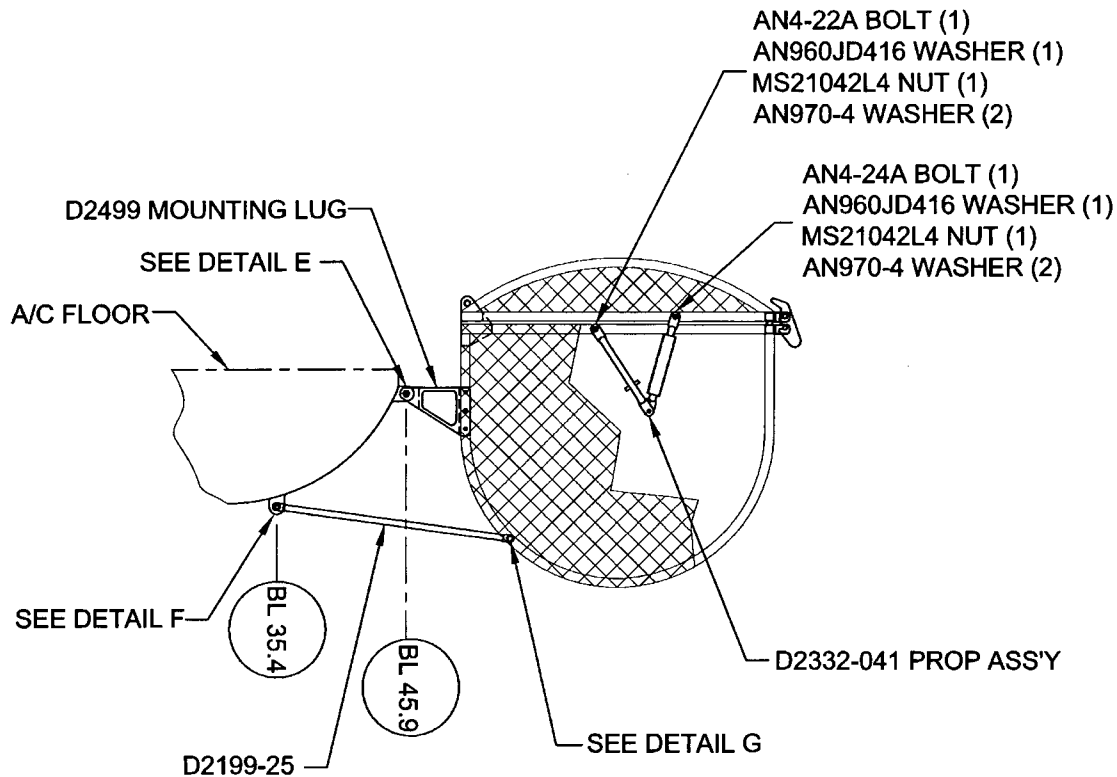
B - Section A-A Looking Fwd at STA 84.29
